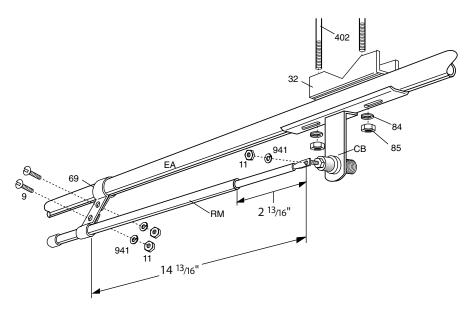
Gamma Match Configuration Showing Adjustment Dimensions
